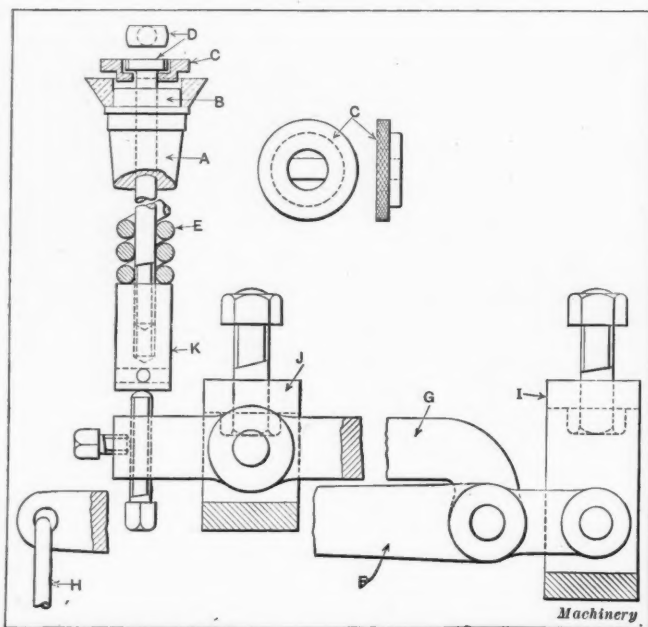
Work-holding Mechanism used on Machine shown in Fig. 9.
